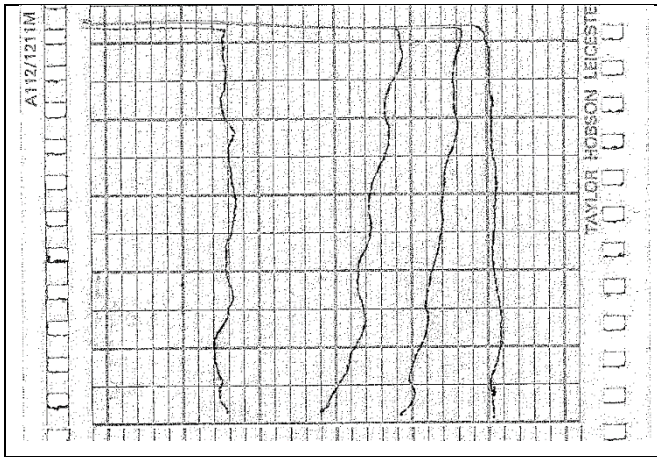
Gear lead of 4 teeth of Gear manufactured on gear hobbing
